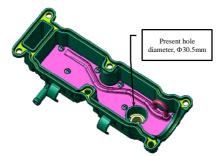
Baffle plate in assembled condition with Cylinder head cover
